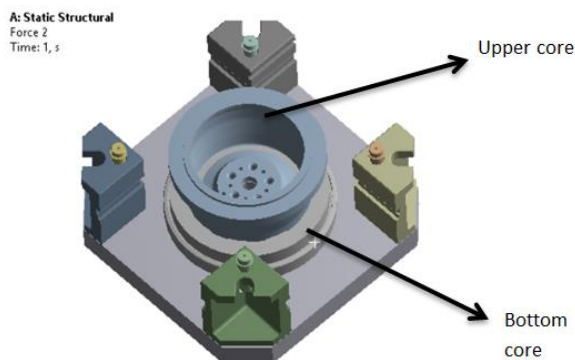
b. The representation of the upper core and bottom core on mold geometry.
